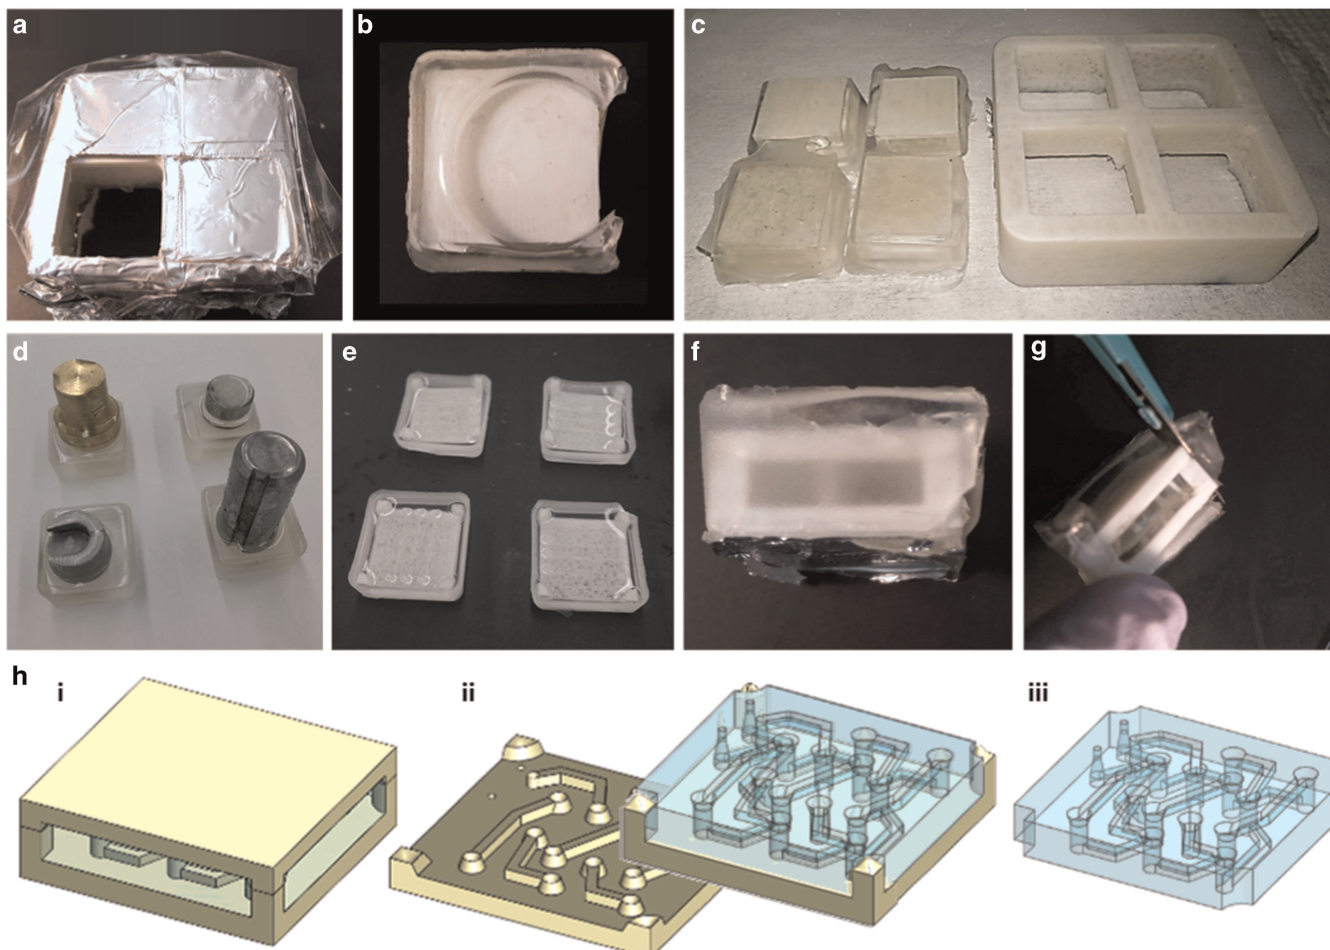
Removing PDMS devices from molding containers and molds. (a) Molding containers are scored at the bottom to release individual dies which are (b) pushed out to remove the mold and excess PDMS. (c) Molding container and individual dies side-by-side (d) Dies with metal weights still attached, and (e) Single-sided mold dies. To cut the mold loose, (f) an individual die is placed on its side, and (g) PDMS is cut loose with a scalpel, using the mold as a cutting guide. Bottom (h) Schematic diagram for removal of PDMS from double-sided mold: (i) released mold with cured PDMS, (ii) top mold removed, and (iii) PDMS component separated from mold.
